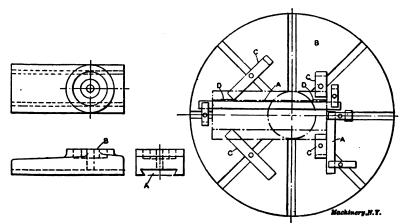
Milling Fixture in which Work is Located from a Previously Bored Hole
